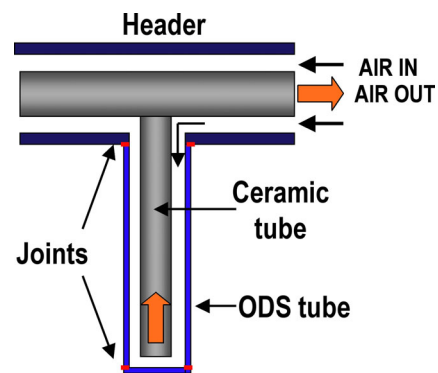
Schematic diagram of ODS tube-to-header joint used in heat exchanger design proposed in the COST-522 program.
